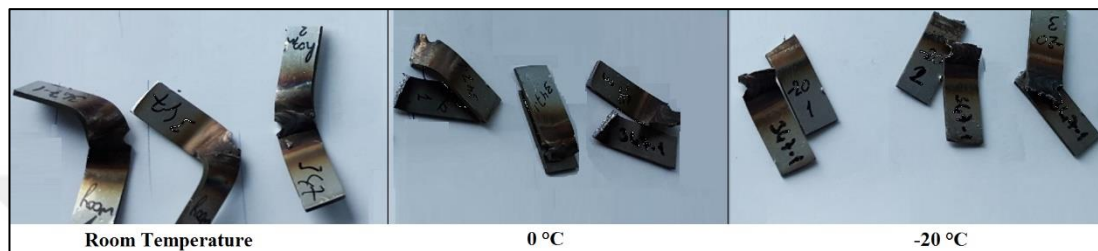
Macro images after impact notch test of samples with ER347 coded filler.
